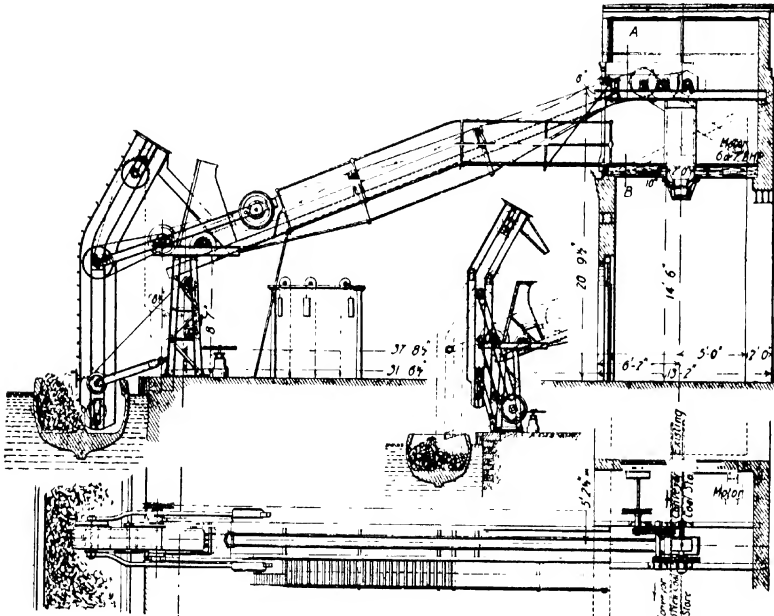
SIDE ELEVATION AND PLAN OF BARGE ELEVATOR CONVEYER AT COVENTRY CORPORATION ELECTRICITY WORKS
